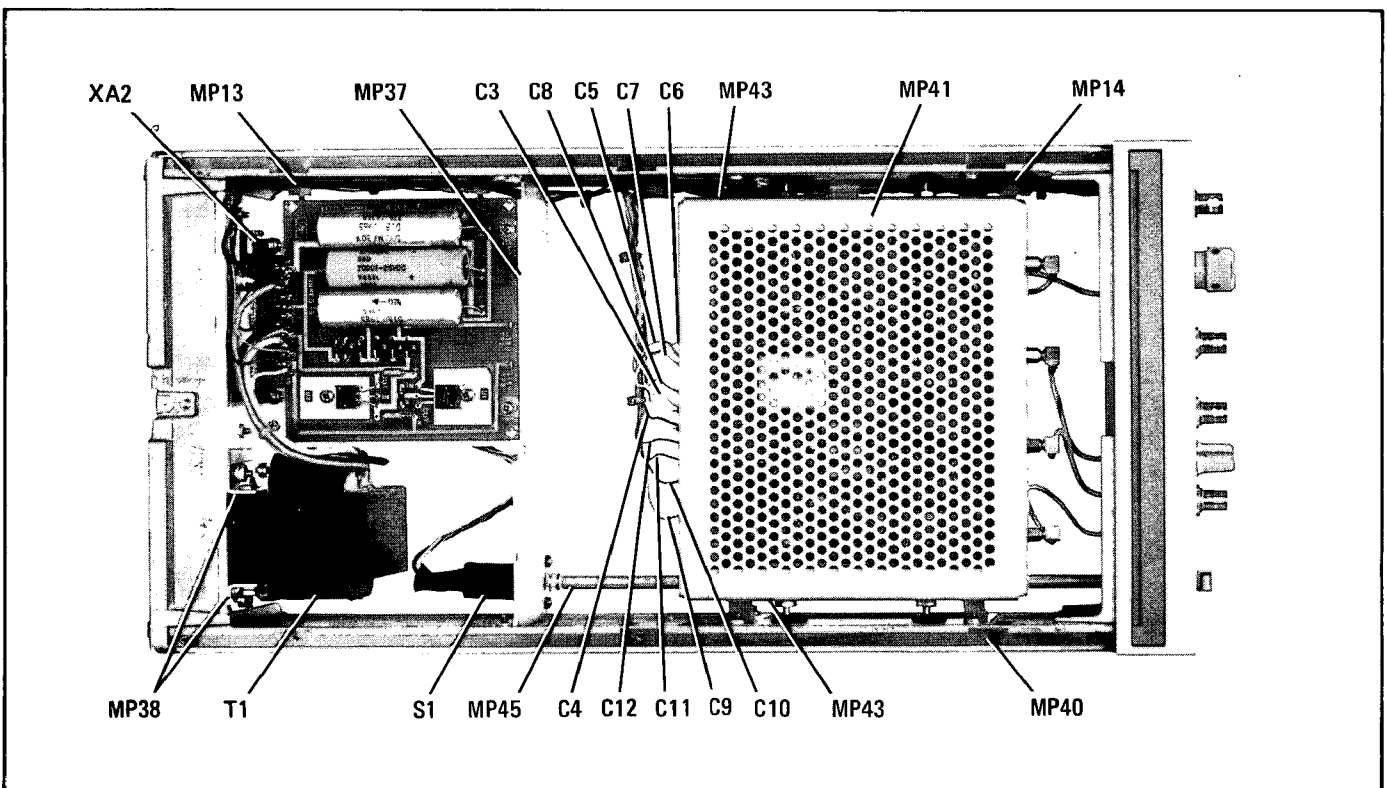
Top Chassis Parts, Mechanical Parts, and Cable Identification
